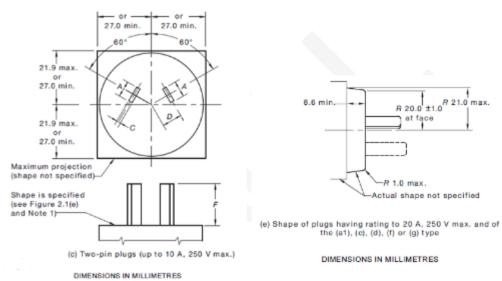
(in part) DIMENSIONS OF PLUGS
